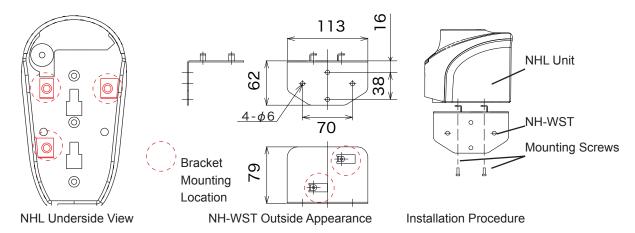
Wall Mount Bracket Installation Diagram
